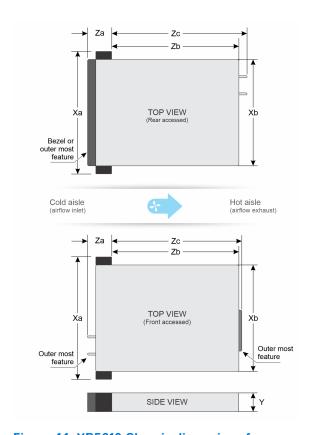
XR5610 Chassis dimensions for rear accessed (top) and front accessed (bottom)
